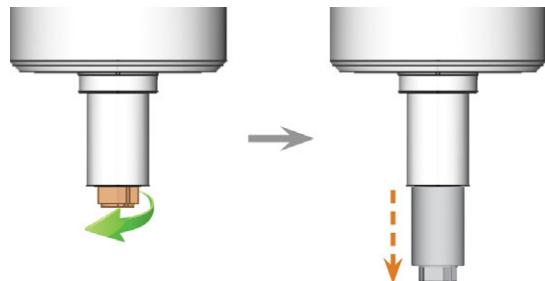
UNSCREWING THE COLLET CHUCK (MARKED ORANGE IN LEFT ILLUSTRATION) WITH YOUR HAND
